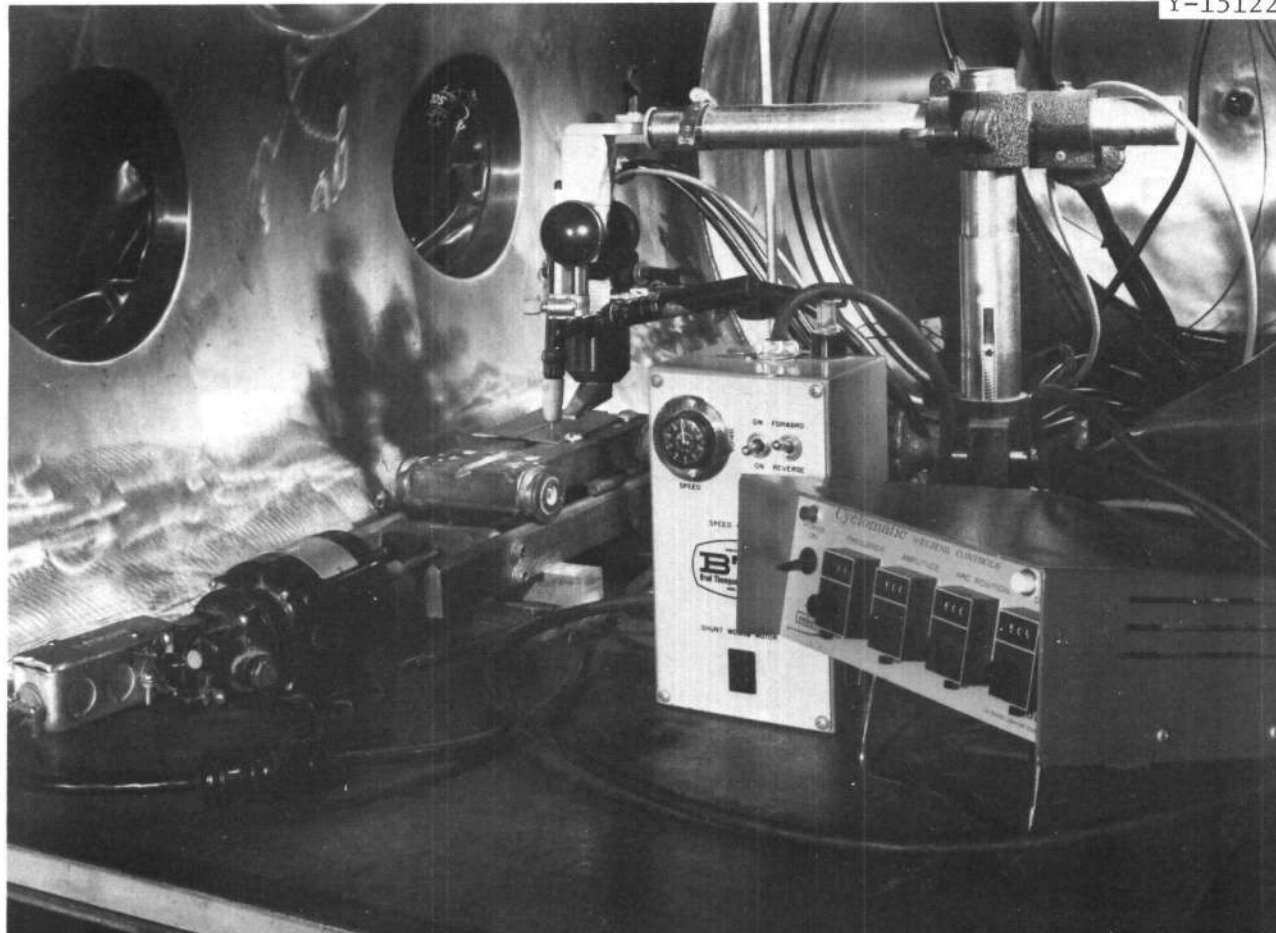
Welding Setup Inside a Dry Box Showing Tungsten Electrode, Magnetic Probe, Travel Carriage, and the Arc Oscillator Control.
